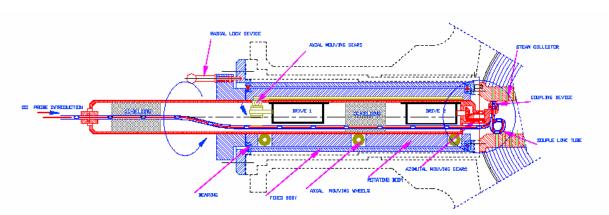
Scheme of the ISI Probe Assembly Bolted on the Steam Nozzle
